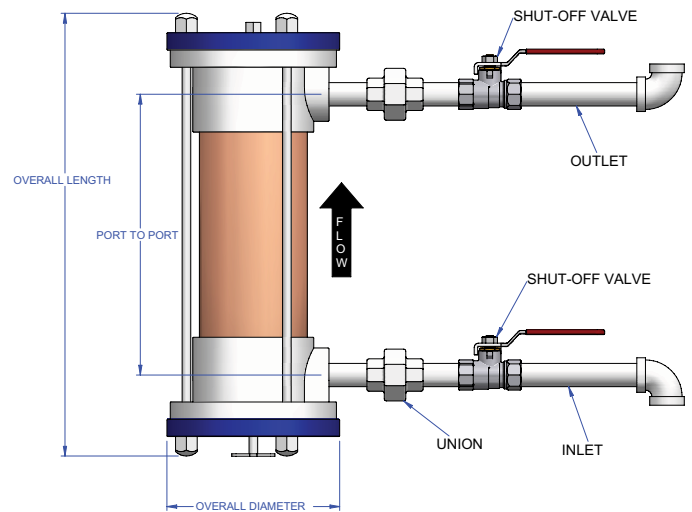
G-60, G-100, G-150, M-60, M-100 & M-150 Series Assembly Diagram
